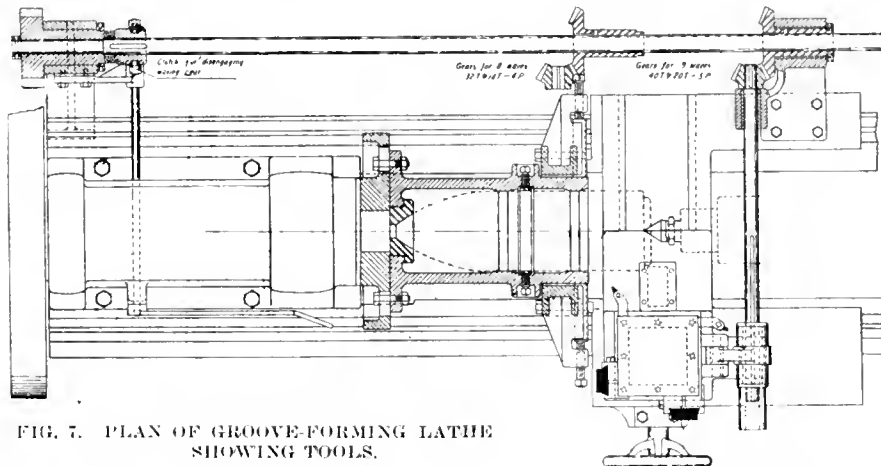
PLAN OF GROOVE-FORMING LATHE SHOWING TOOLS.
